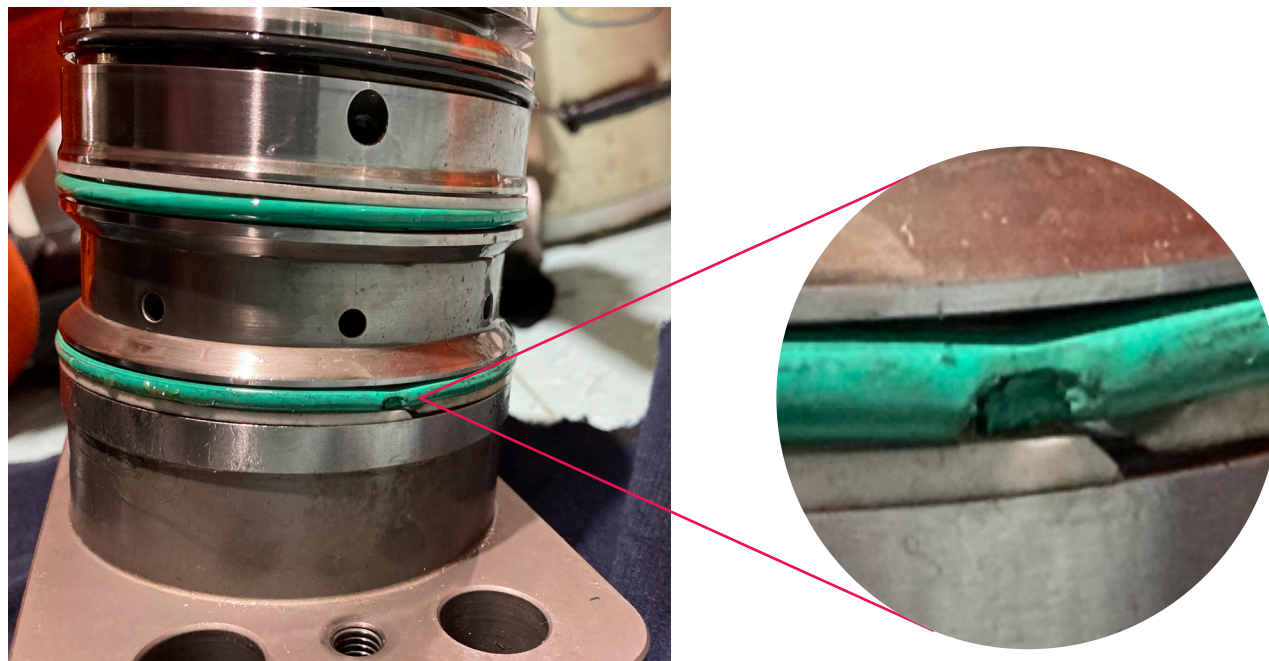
The backup ring and the oblique cut damaging the O-ring
